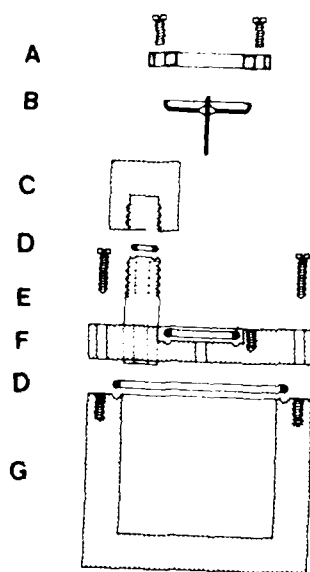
Vacuum-tight battery housing of test battery: A, aluminum disc to hold kovar disc (B) in its place; B, kovar disc with glass feed-through and stainless steel wire as positive terminal; C, filling tube cap; D, o-ring; E, electrolyte filling tube; F, cell lid; G, aluminum cell house (negative electrode).
